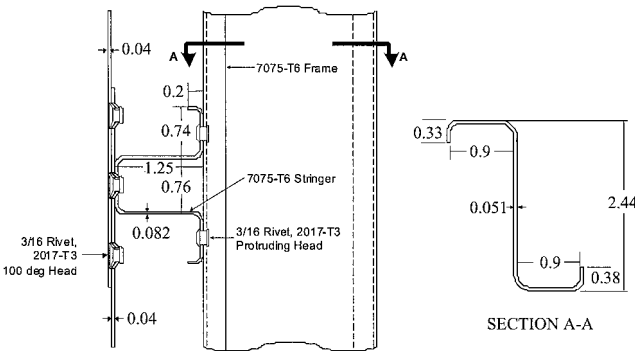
Dimensions of stringer and frame for the KC-135 fuselage panel (dimensions in inches; 1 in. = 25.4 mm; modified after Ref. 6).
